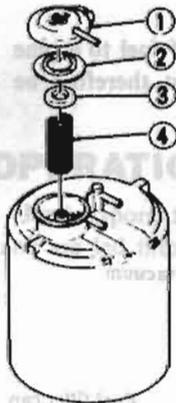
Checking Carbon Canister Purge Control Valve
